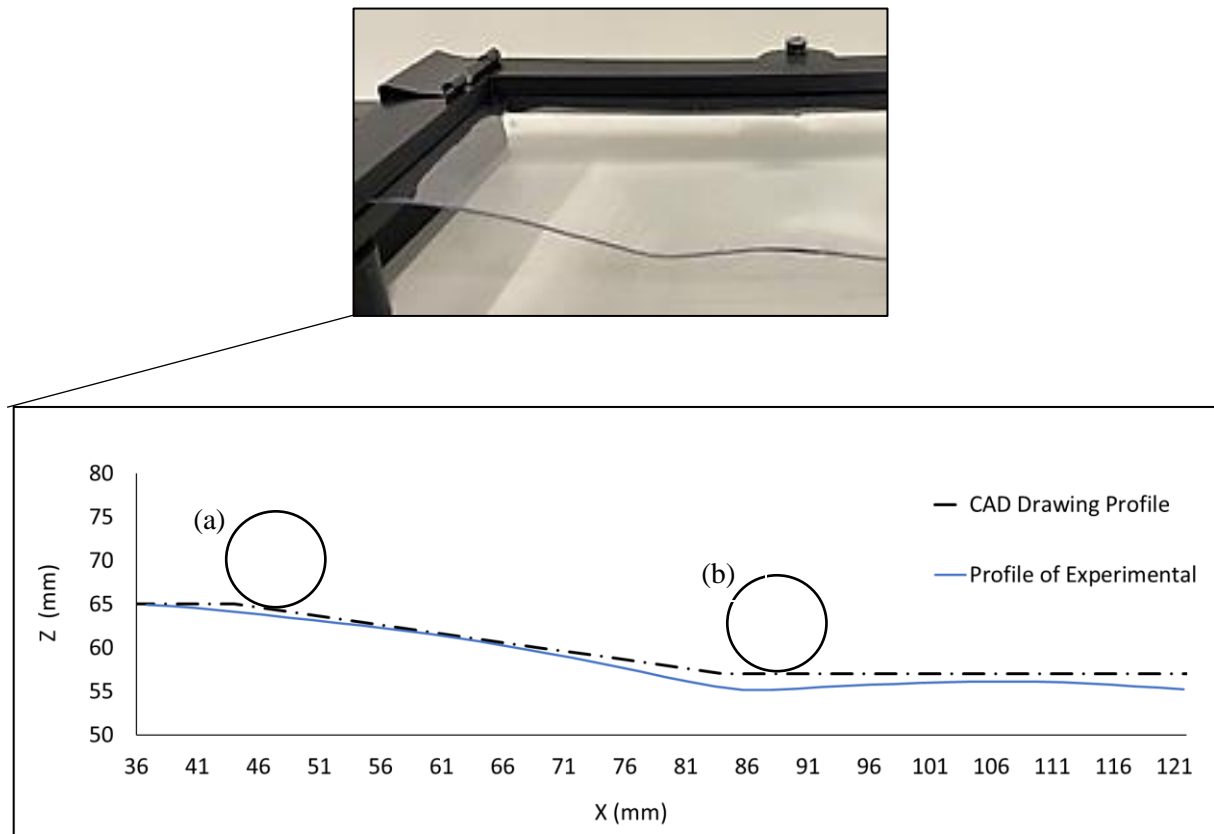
Comparison between CAD drawing and deformed PC workpiece using CIPF technique. (a) Deflection at the base of the shape (b) Deflection near the centre of the shape.
